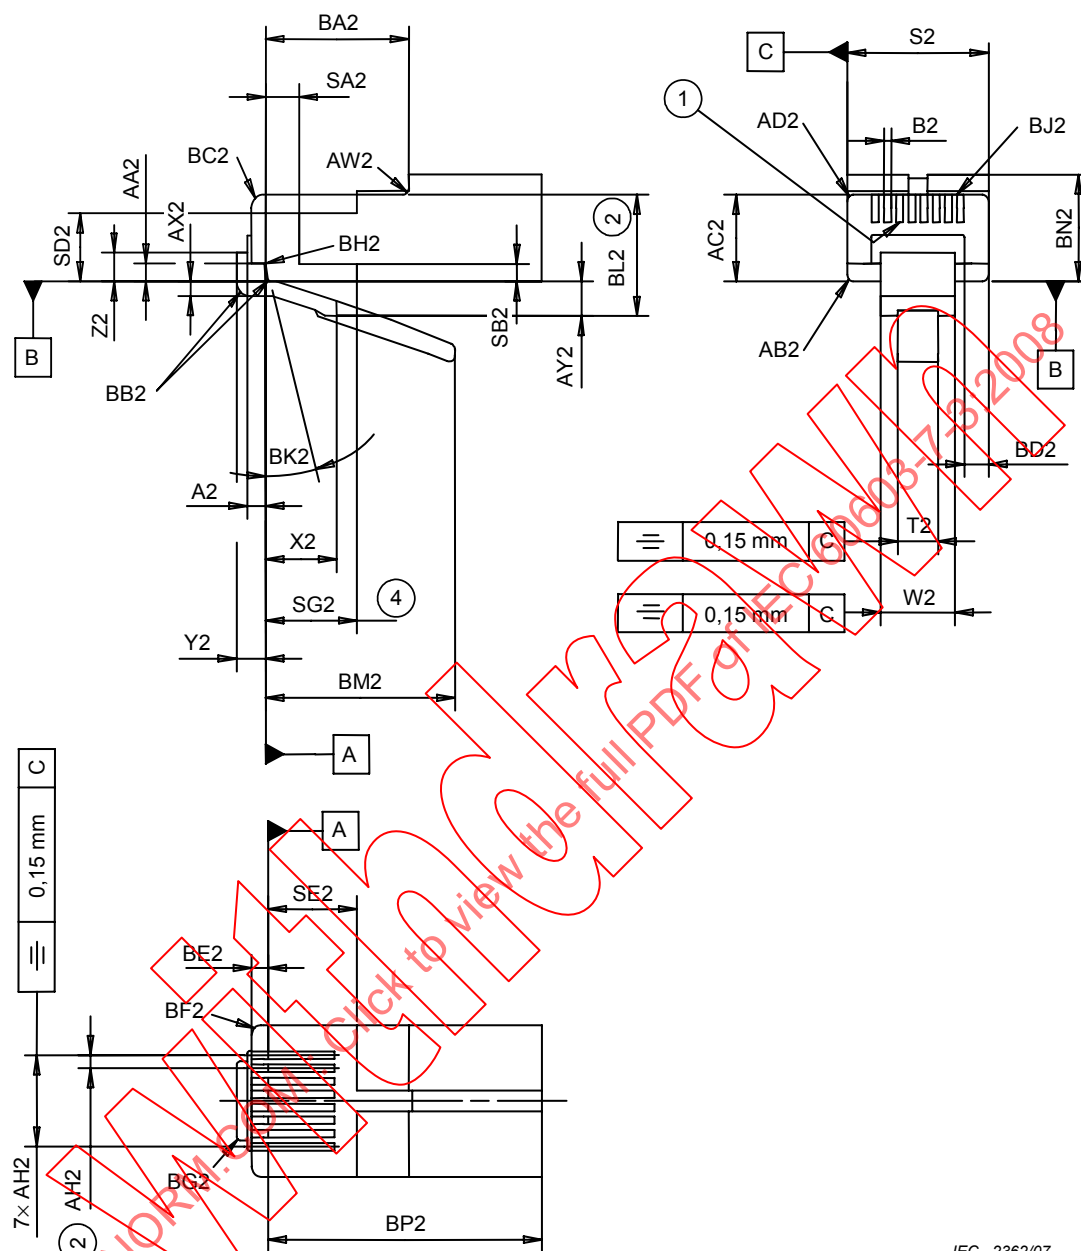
Section A-AFigure 3 – Fixed connector details
